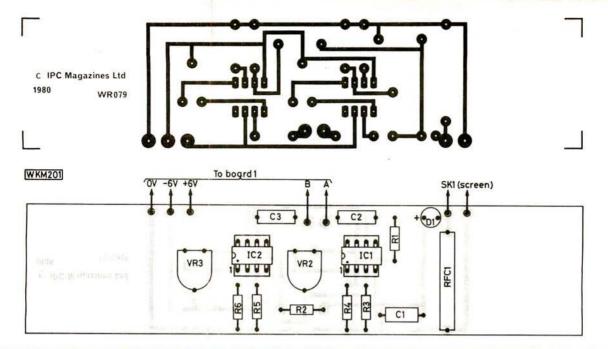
The copper track pattern (top) of the r.f. input board shown full size with the component placement drawing below it
